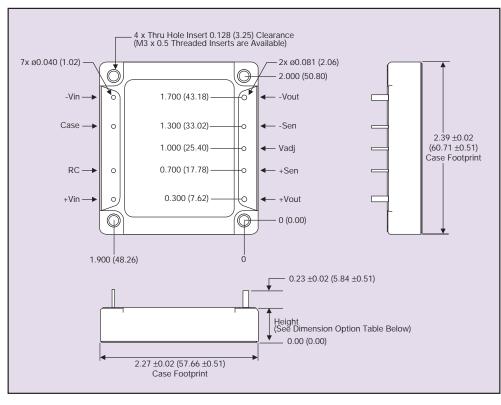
Mechanical Drawing, Dimension Options and Pin-Out Table
